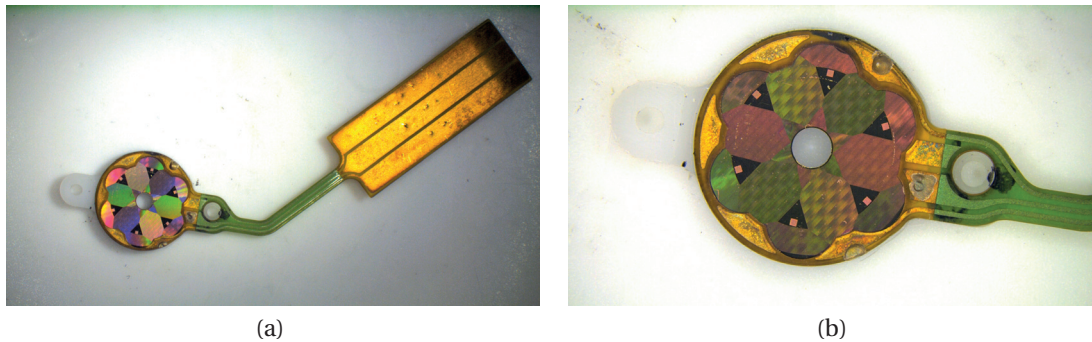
Stator glued to flexible PCB: (a) complete view and (b) detail.
